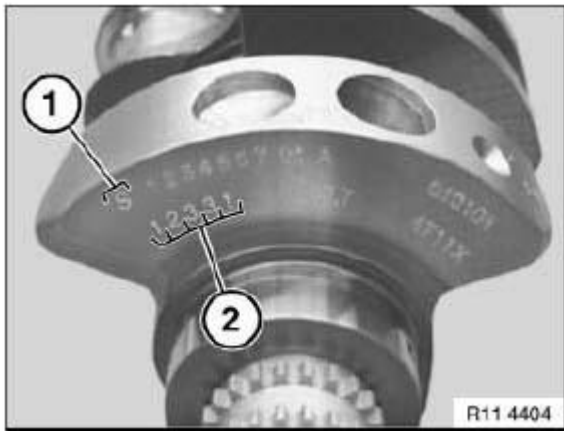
Identifying Crankshaft Construction Stage And Bearing Shell Classification
